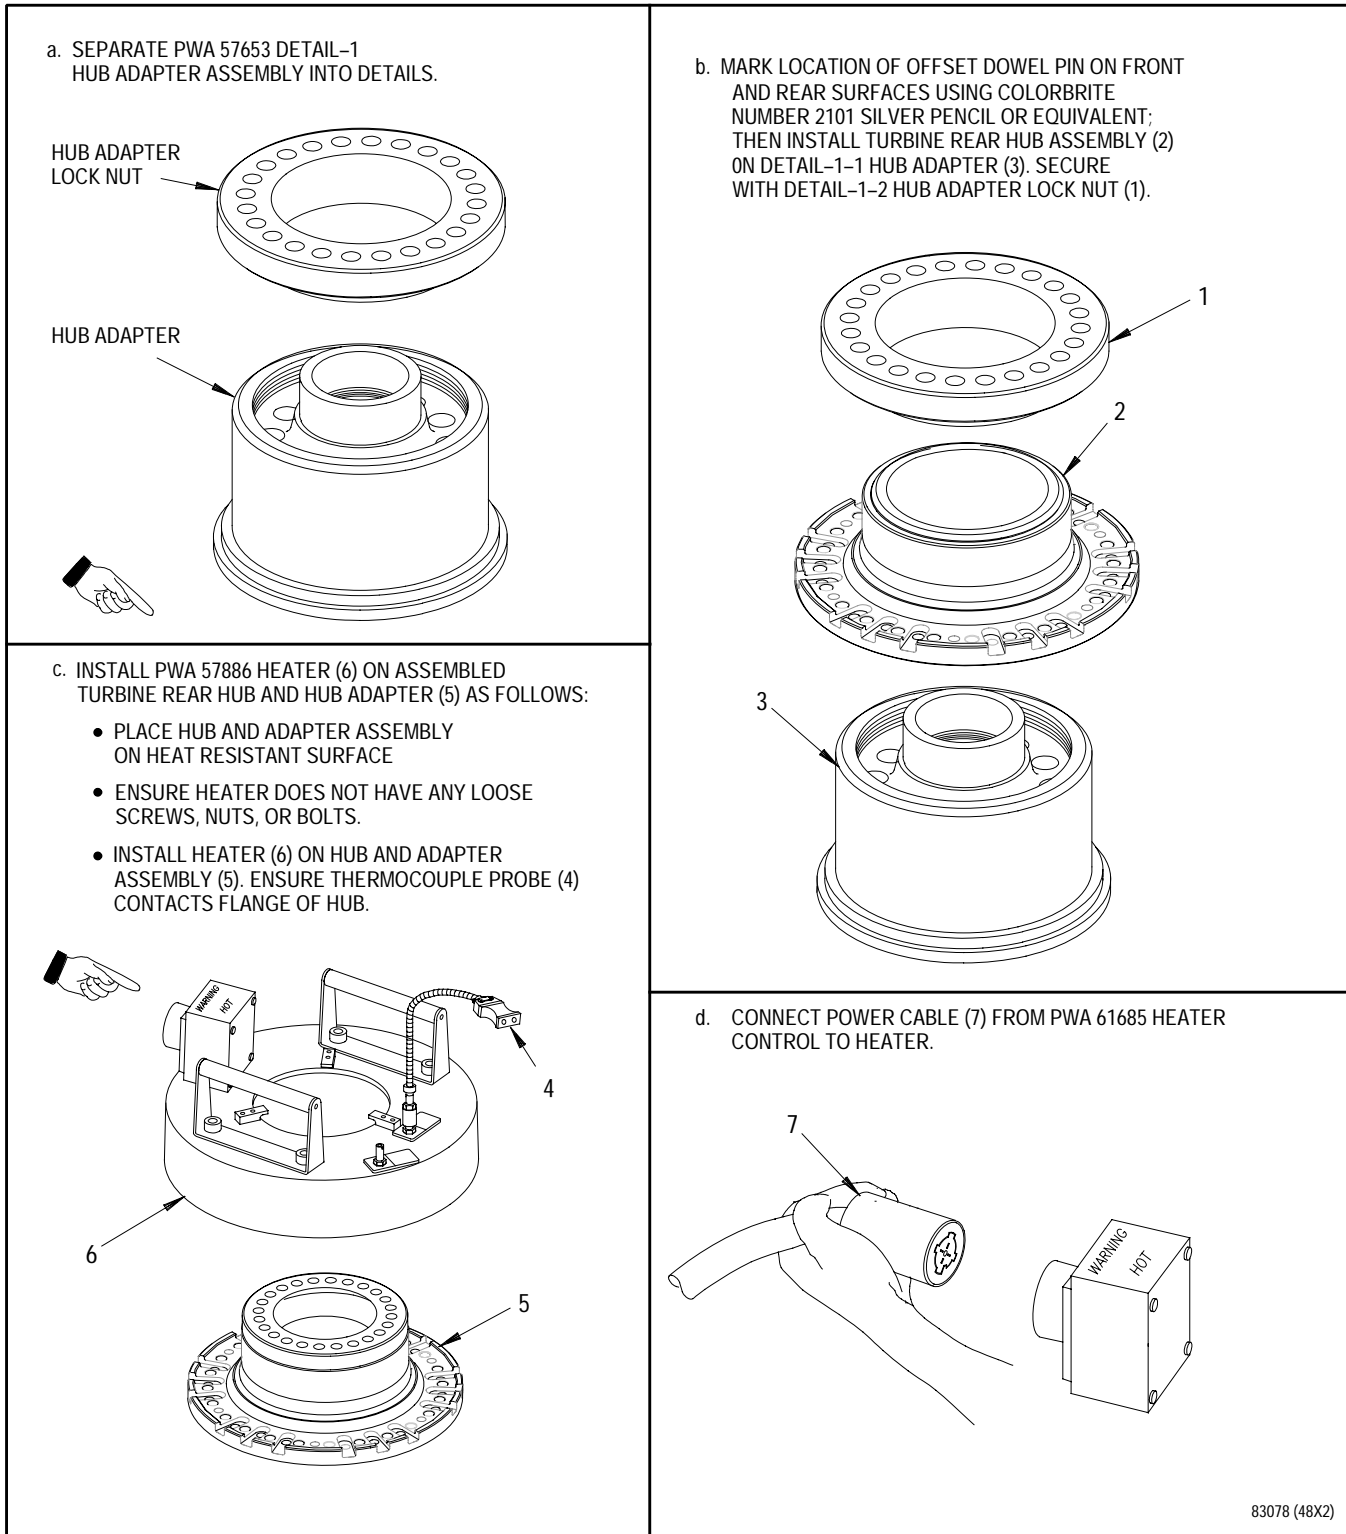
Turbine Tierods - Installation Using PWA 57528 Assembly Tool (Sheet 3 of 3)
